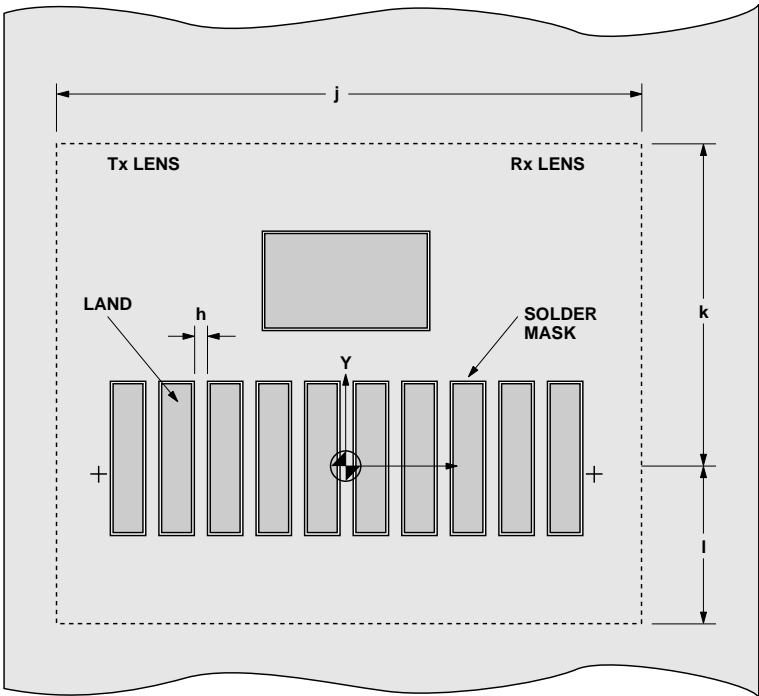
HSDL-3610#007/#017 PCBA – Adjacent Land Keep-out and Solder Mask.
